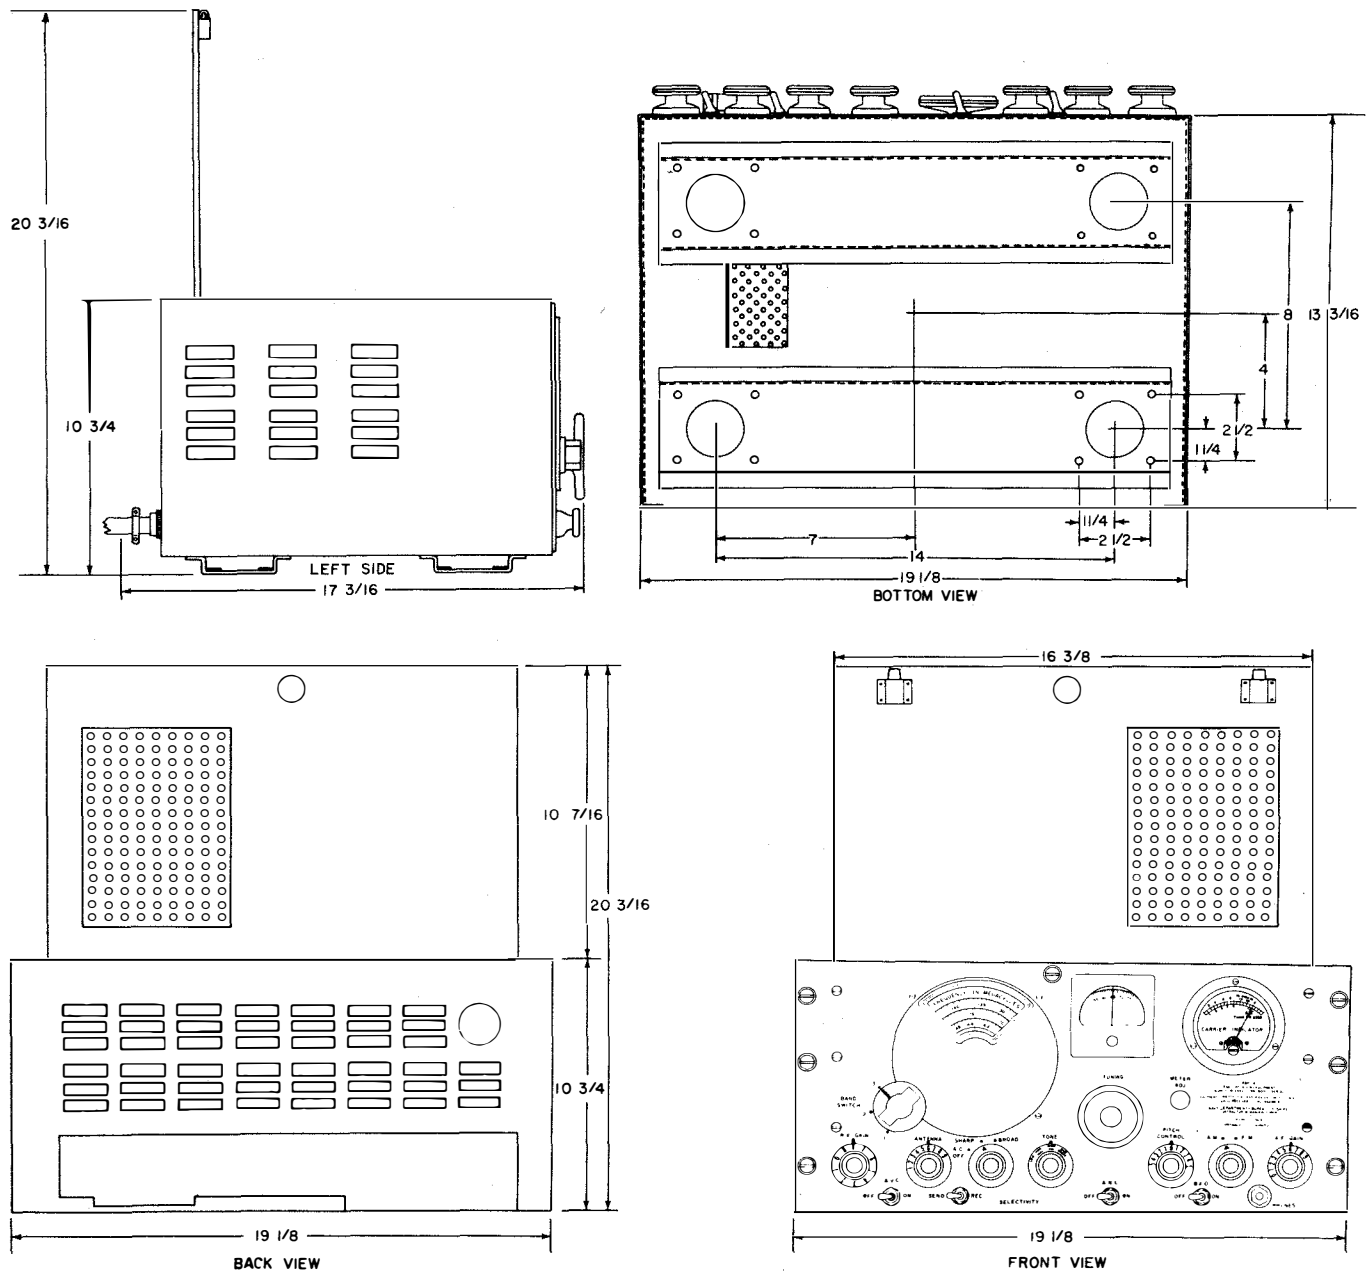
Radio Receiving Equipment Navy Model RBK-16, Dimensional Drawing Having Three Views.
